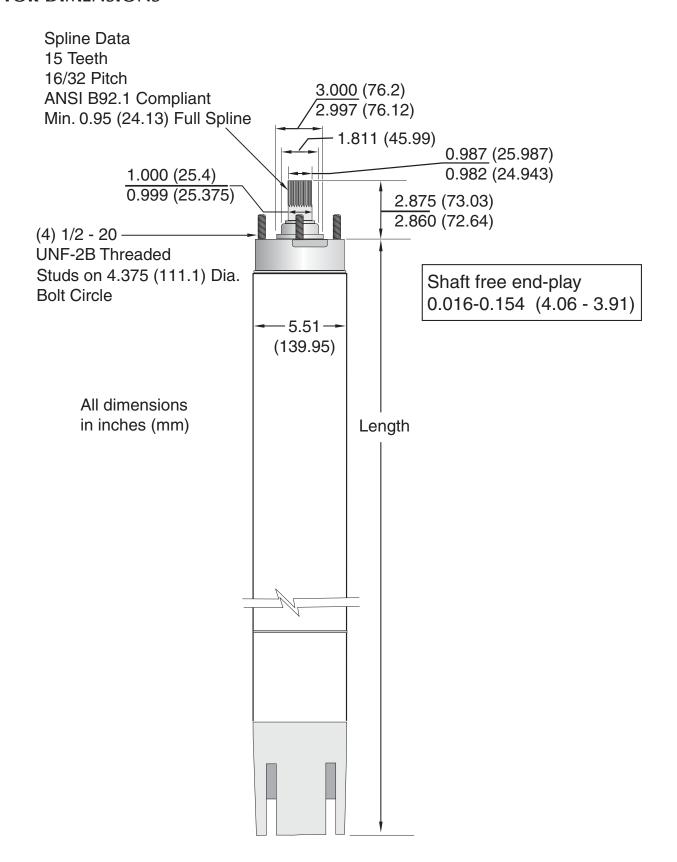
6" Motor Dimensions PN793 (Rev. 8/23/06)
